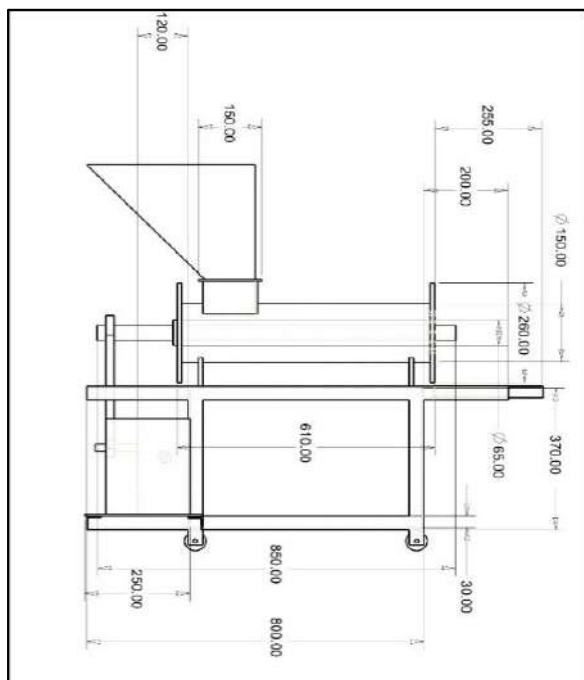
Layout of fabricated pellet machine with dimension (mm)
